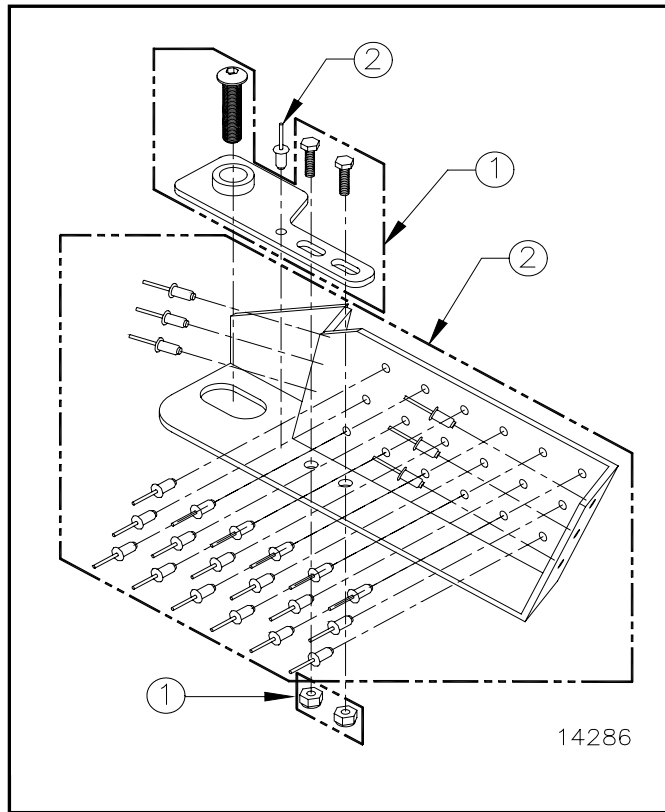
RAMP MOUNTING BRACKET ASSEMBLY
